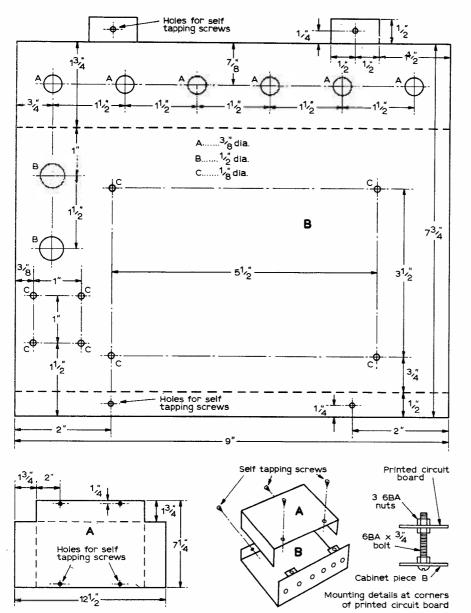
The cutting and drilling details of the two piece aluminium cabinet.
